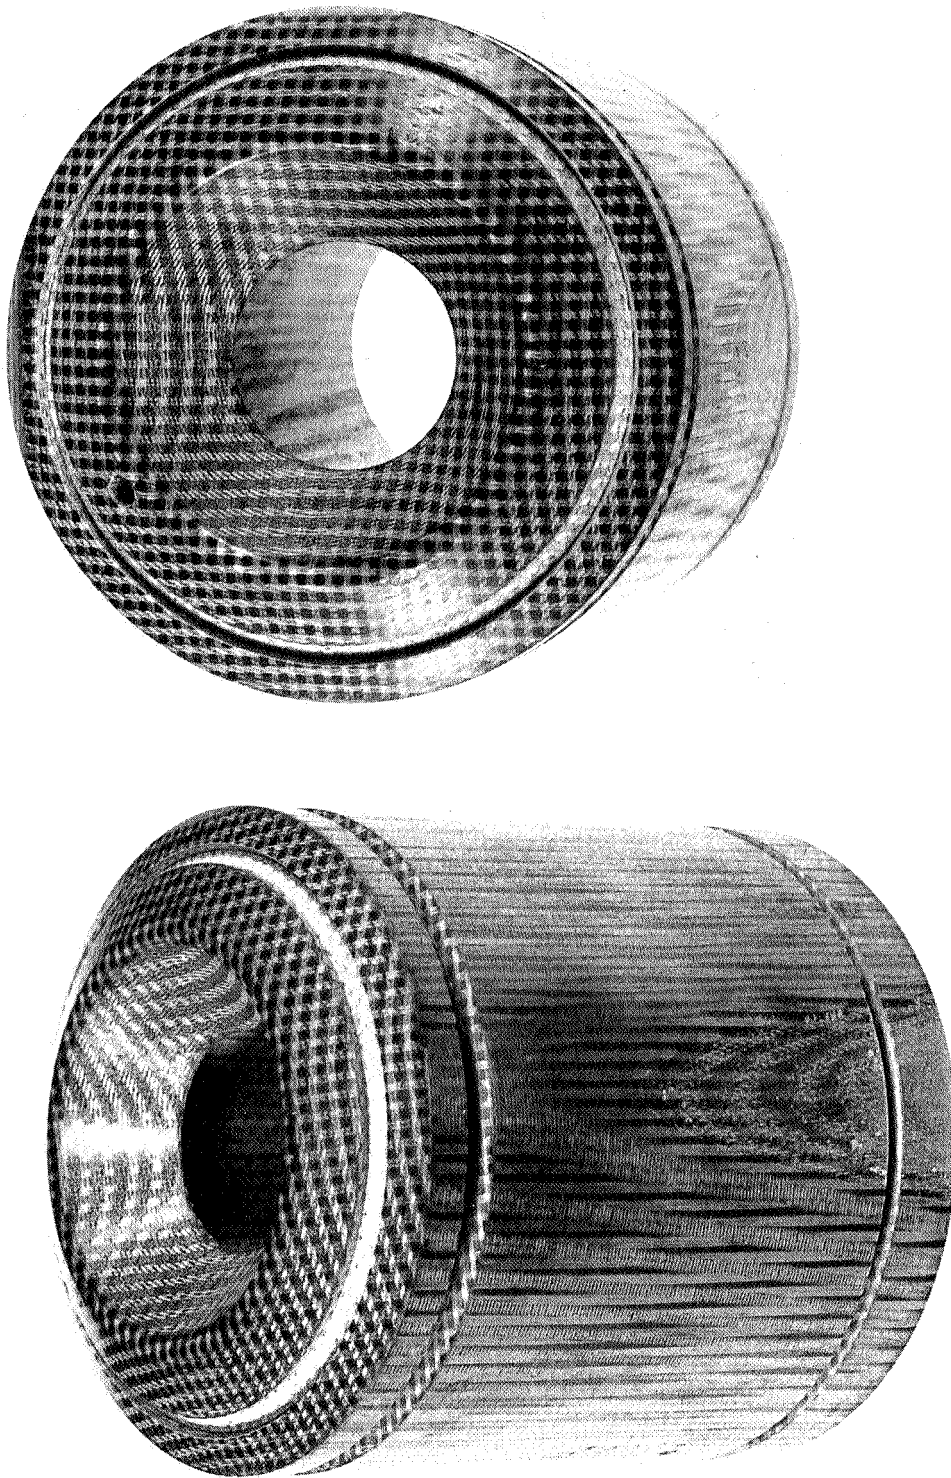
SIDE VIEW AND END VIEW OF CHAMBER NO.1
